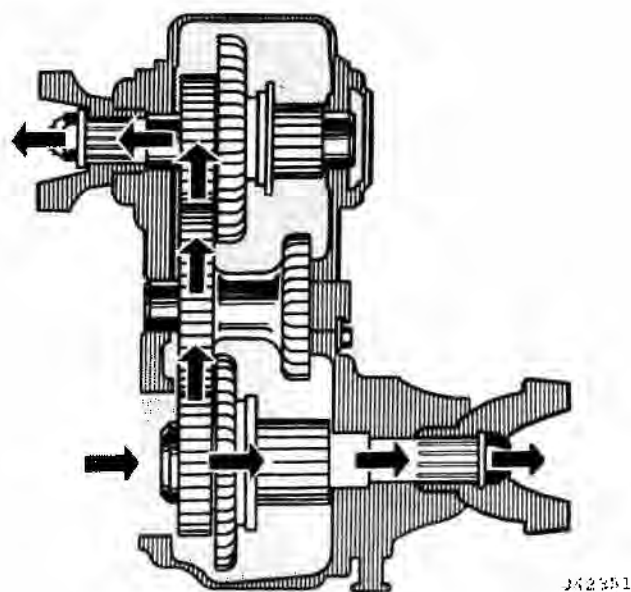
Silent Transfer Case in 2-Wheel Drive
